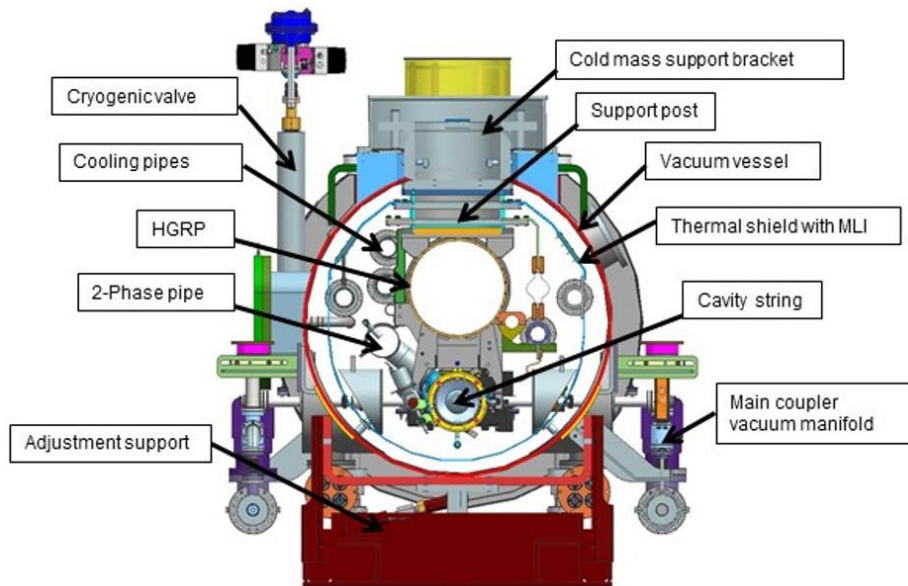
LCLS-II 3.9 GHz cryomodule assembly cross-section
